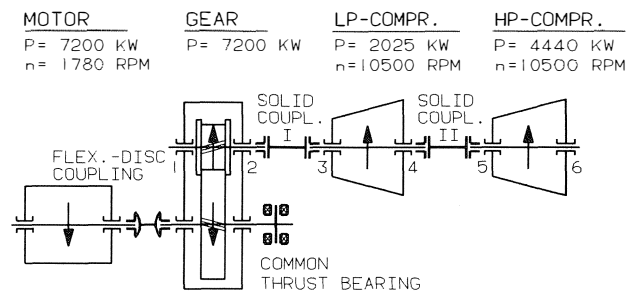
Basic Arrangement for a Motor/Gear Driven Compressor Train Equipped with Solid Couplings in the High-Speed Rotor String.
